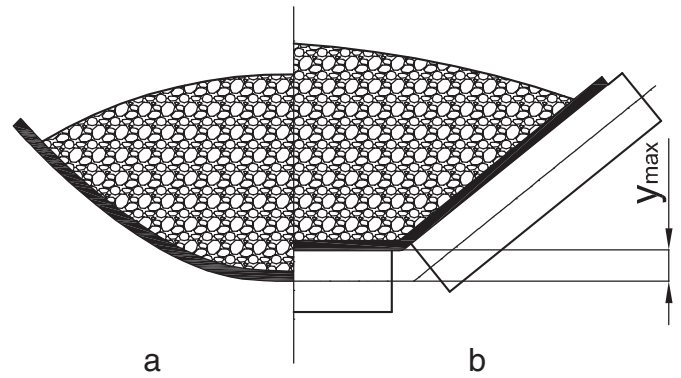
Typical belt and bulk solid re-shaping, where: a) half section B–B and b) half section A–A (Fig. 1).
